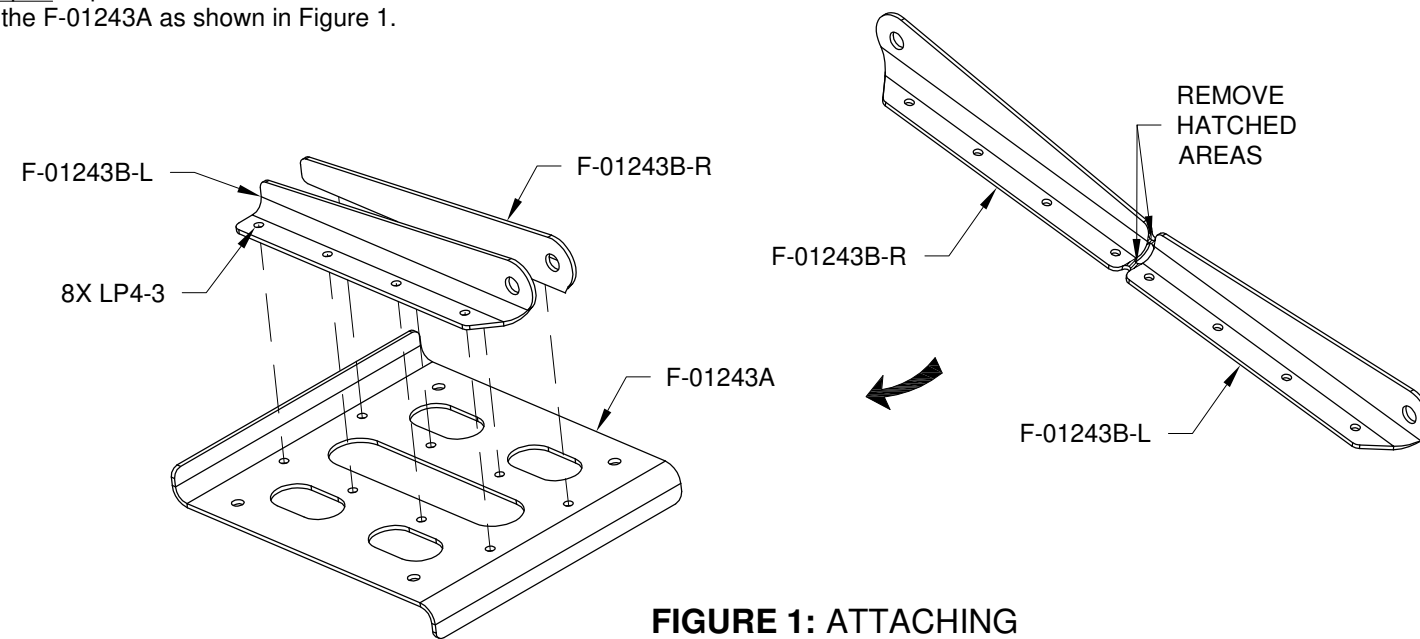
ATTACHING THE FLAP MOTOR ATTACH BRACKETS
